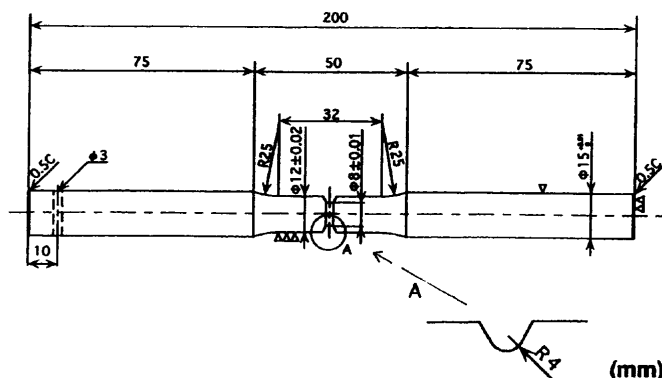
Shape and size of the rotating bending corrosion fatigue test piece for solution dropping test.
